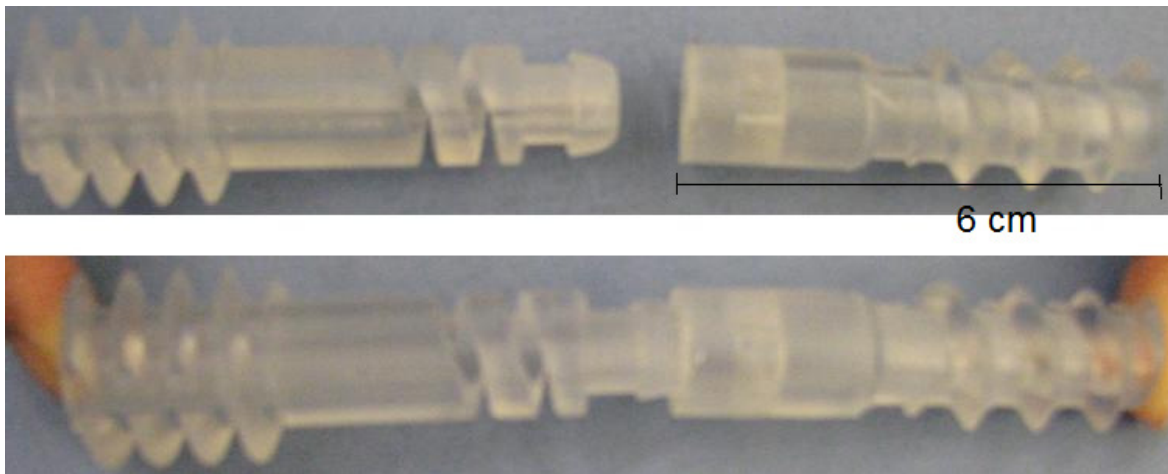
Prototyped Zip-tie model made from a rapid prototyping machine using SLA technique. The top image shows the two parts before insertion and the bottom image shows how they would insert for assembly. Assembly was not possible just by applying force with the hand. These parts are six times larger than actual size
